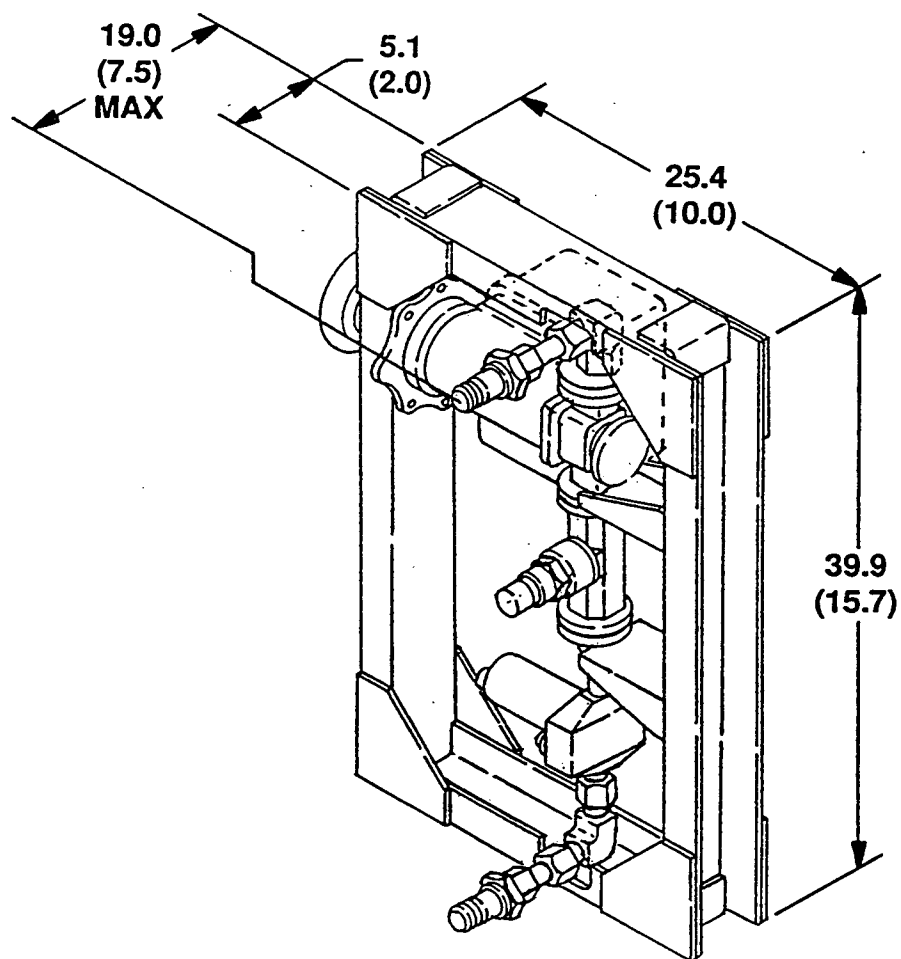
CORE RACK COOLANT RETURN VALVE ASSEMBLY
